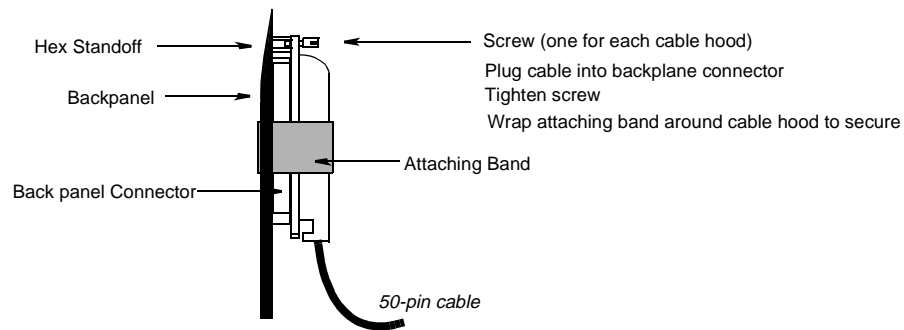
Universal Backplane Grounding Kit for Shielded Cables
